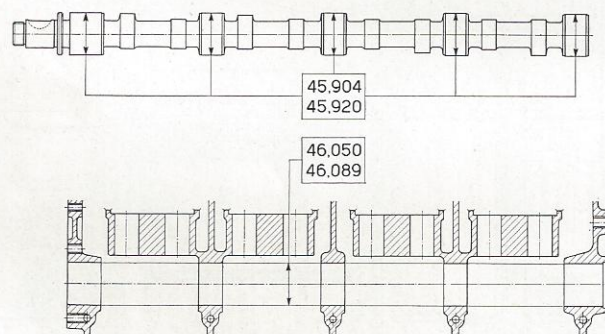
/7. - Dimensions of camshaft journals and bores in crankcase.
